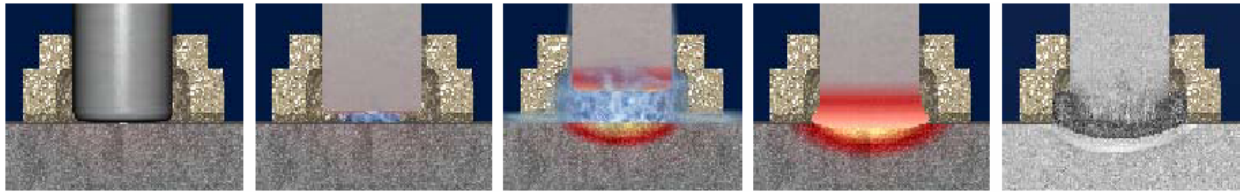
Sequence of welded joint creation during arc stud welding process [2,3]
